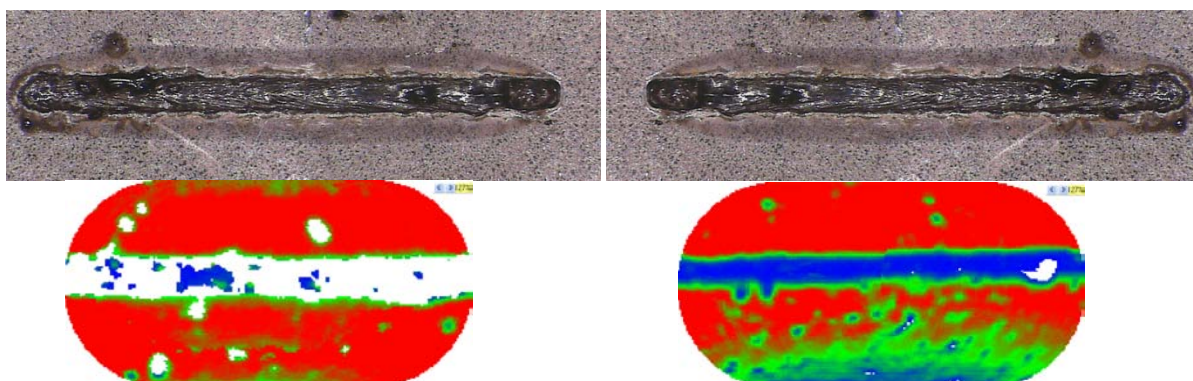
Weld top bead (0mm gap, sample A) and Amstech result from top bead (L) and bottom bead (R)
